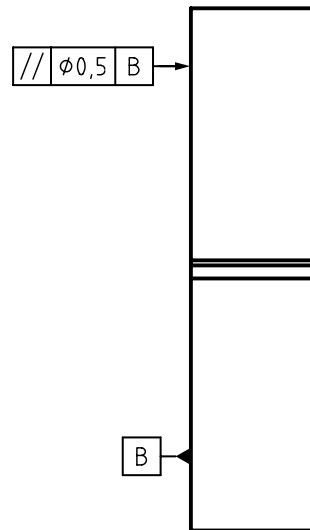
Tolerance of parallelism for the tensile adhesive specimen form A exemplary shown
